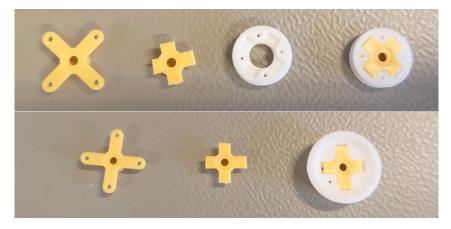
Assembly of the tendon coils. Top: Body coil, Bottom: Leg coil
